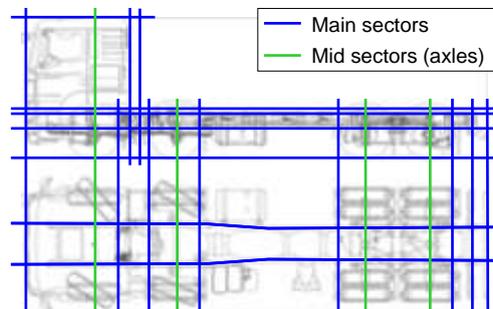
Packaging spaces visualized by superposing qualitative grid and technical drawings in [12, p. 10]
